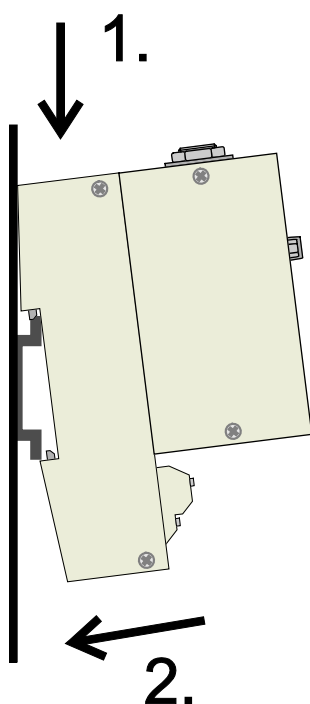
Mounting the *TO-PASS*® telecontrol module to the DIN rail
